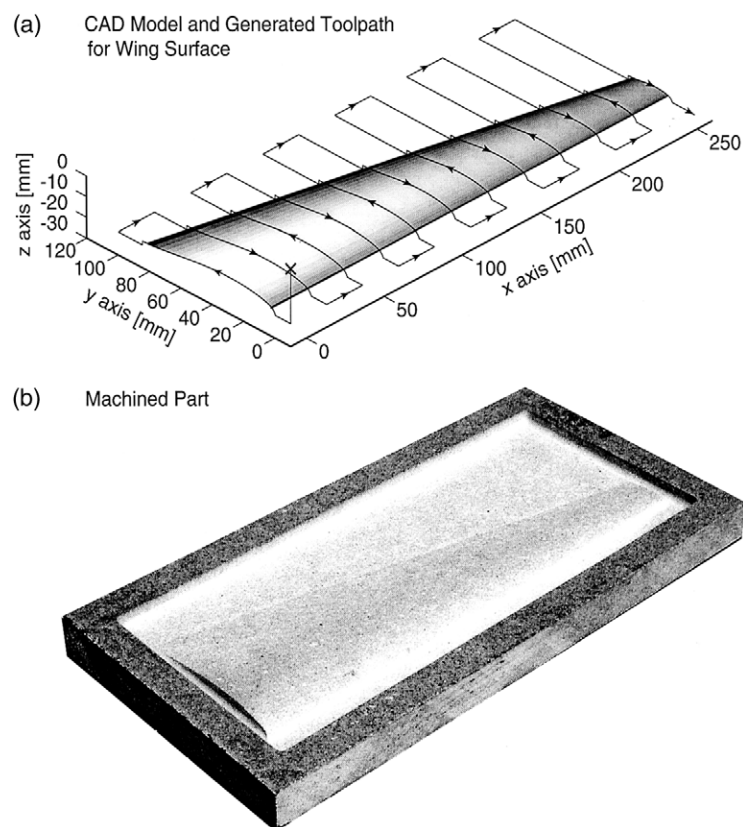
Wing surface machined using quintic spline interpolation with jerk limited feedrate generation: (a) CAD model and generated toolpath, (b) machined workpiece.
